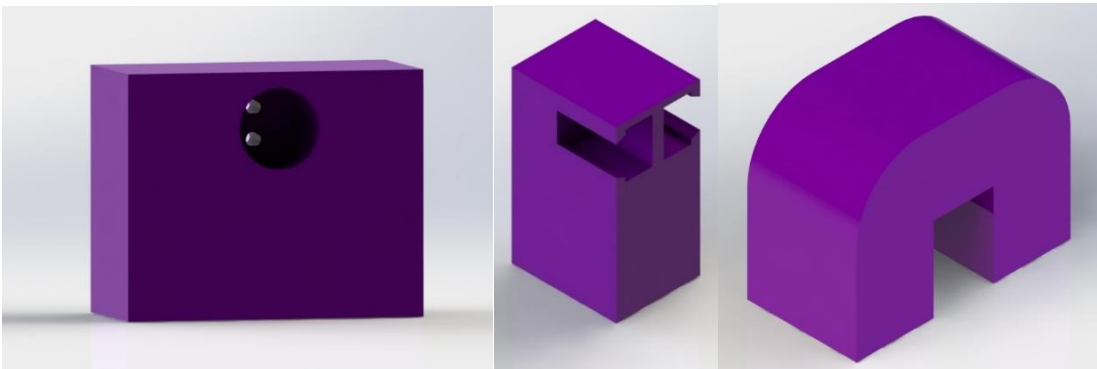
From Left to Right: IR Emitter LED mount, IR Receiver Mount, Centerbar holder.
